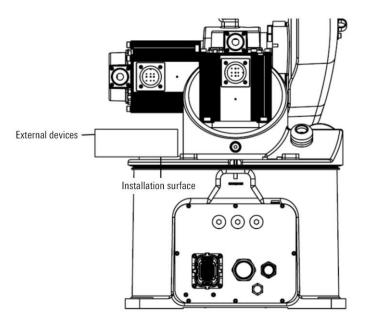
AIR10-1700A-HW manipulator shoulder load installation dimensions diagram
